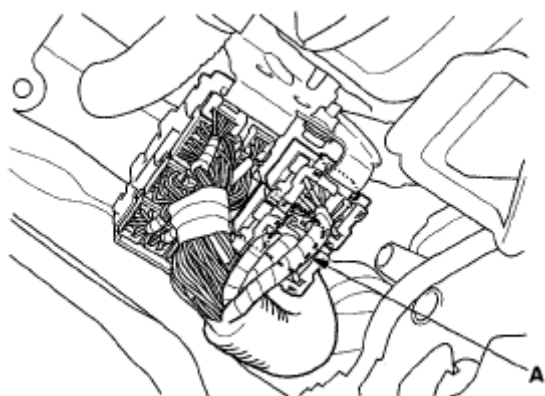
Identifying Fuel Shut-Off Solenoid Valve Relay
